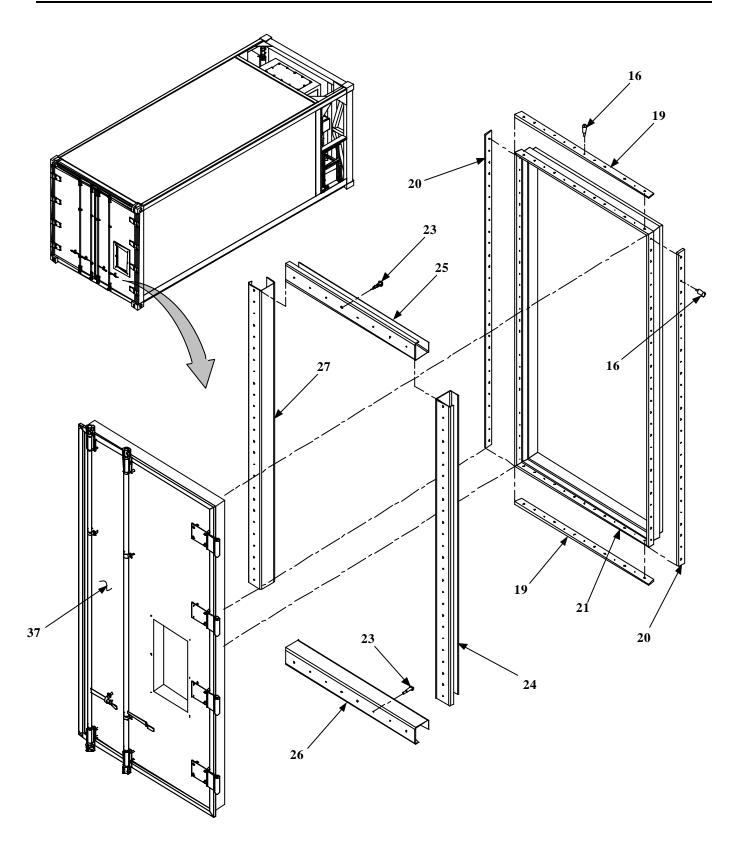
Right Hand Door Assembly (Sheet 3 of 4)
